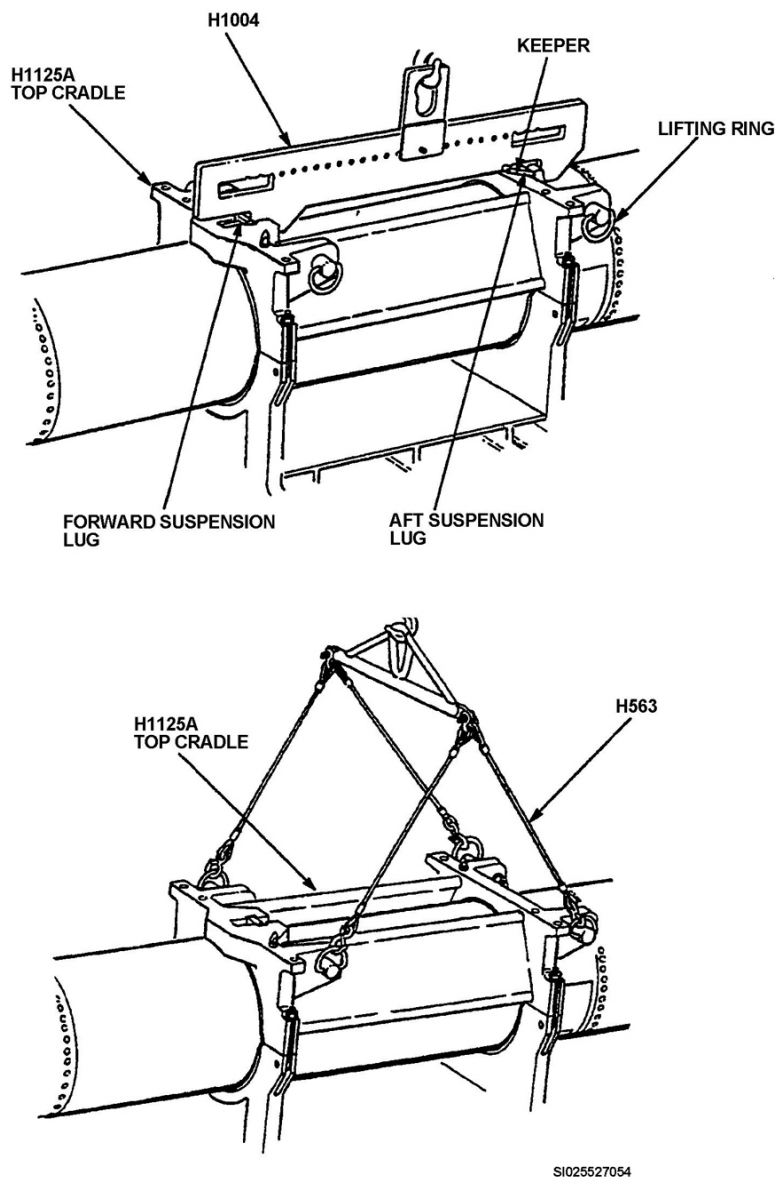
H1004 bomb-hoisting adapter and H563 sling.
